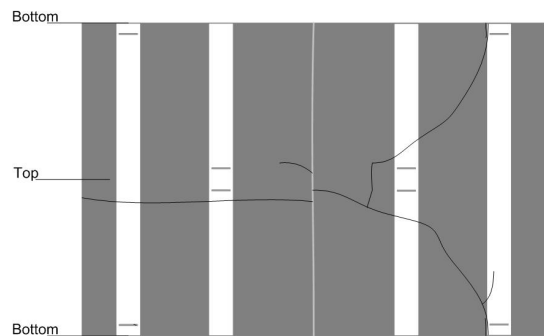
Fracture pattern in the SiC tubes of specimen 6. The perimeter is laid out
